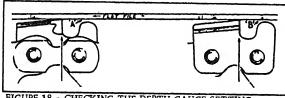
CHECKING THE DEPTH GAUGE SETTING.
